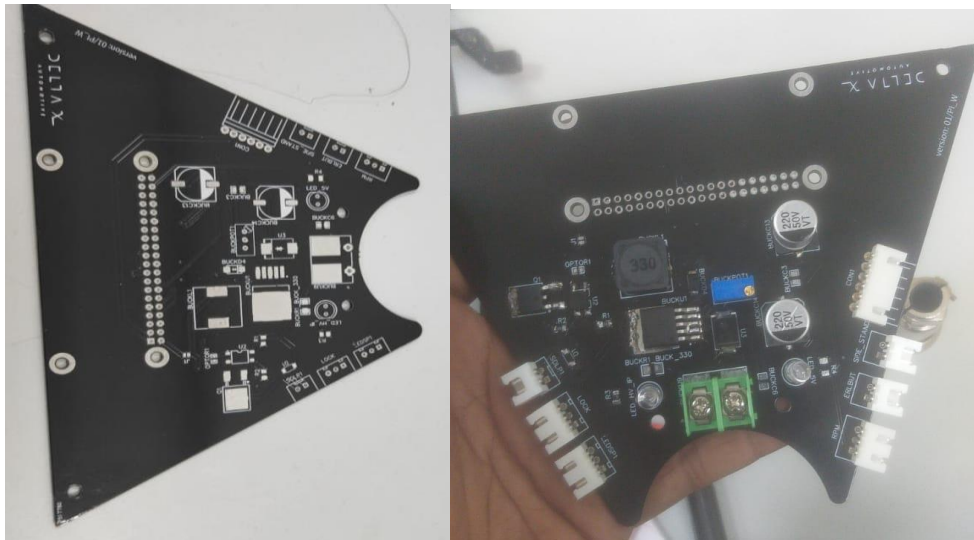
(a): Unsoldered board Fig 3 (b): Soldered board
